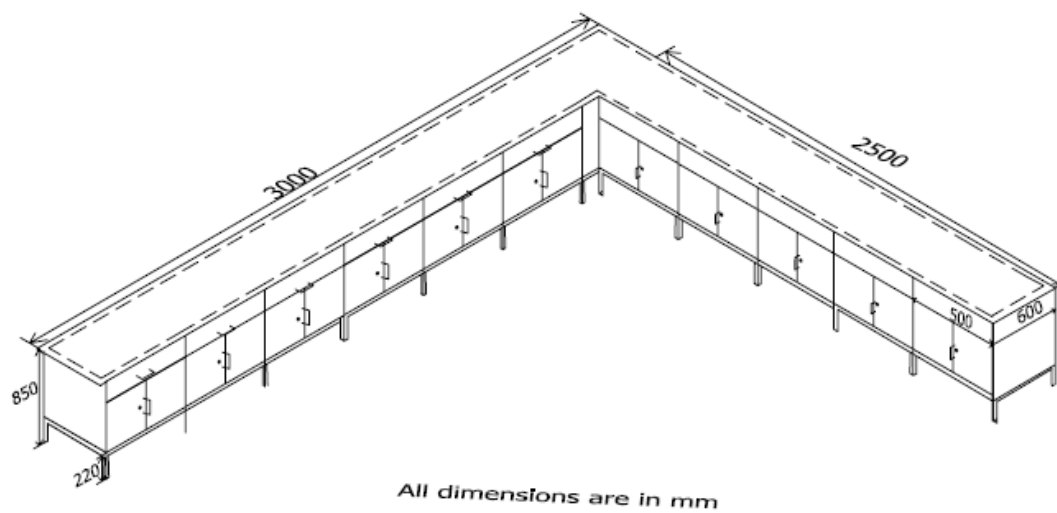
Fig. B Indicative drawing of MS Lab fixture for Sensory lab
